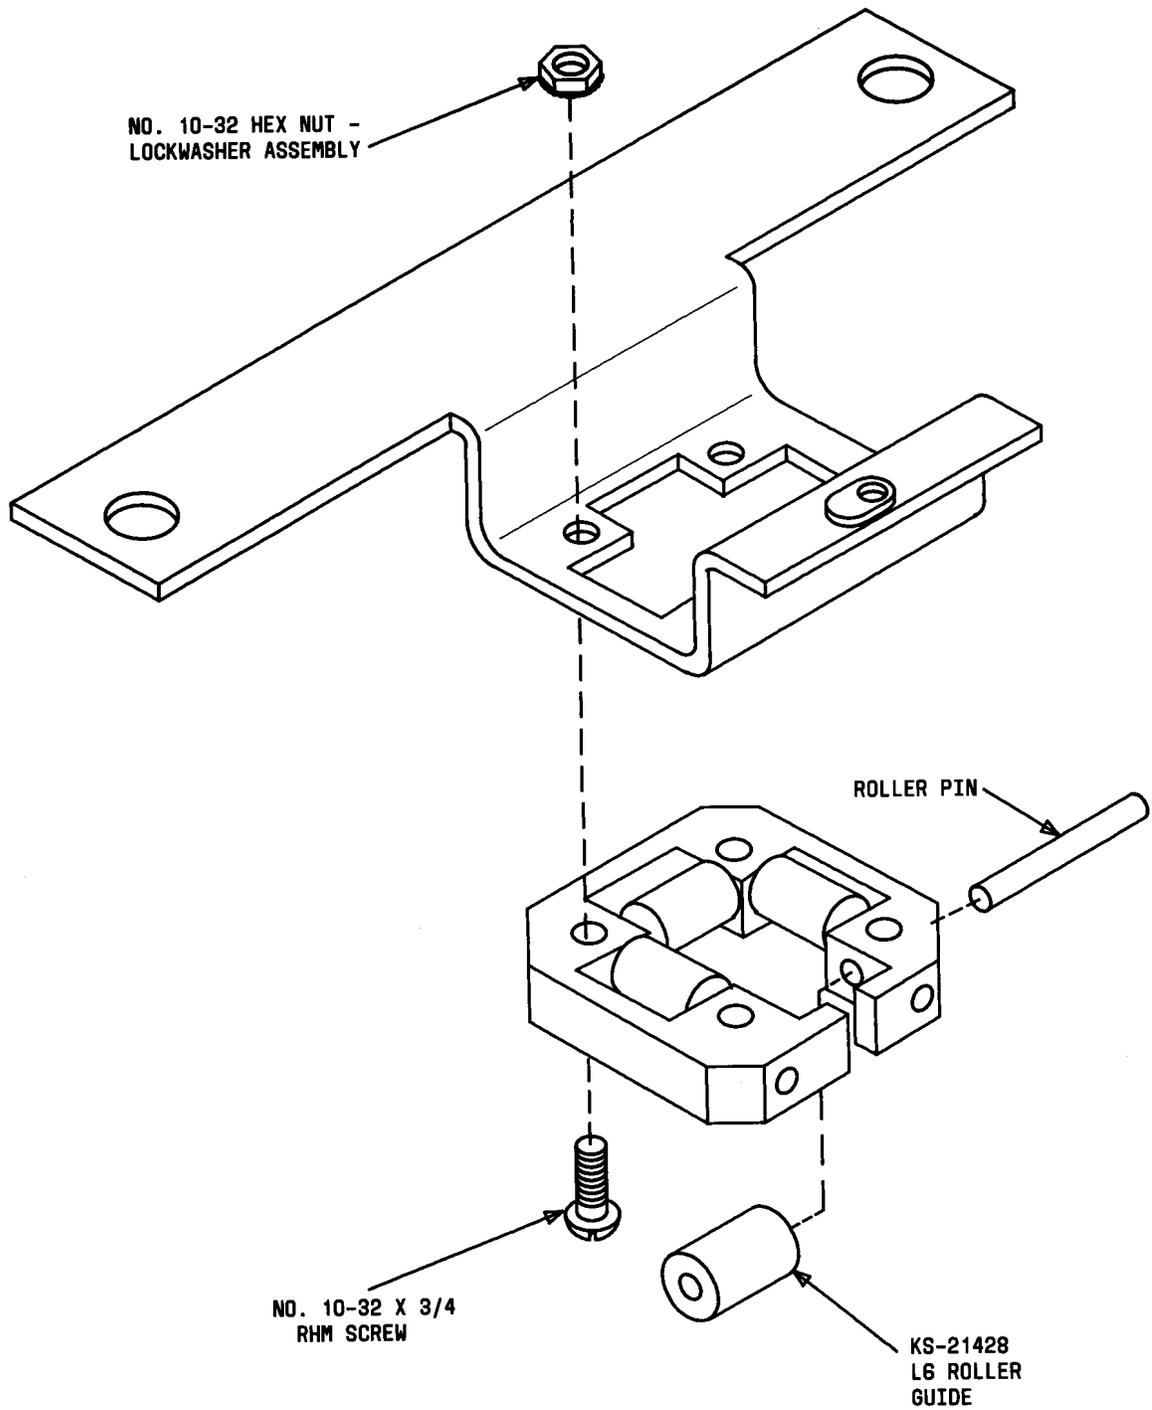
KS-21428, List 5 Roller Guide Bracket Assembly
